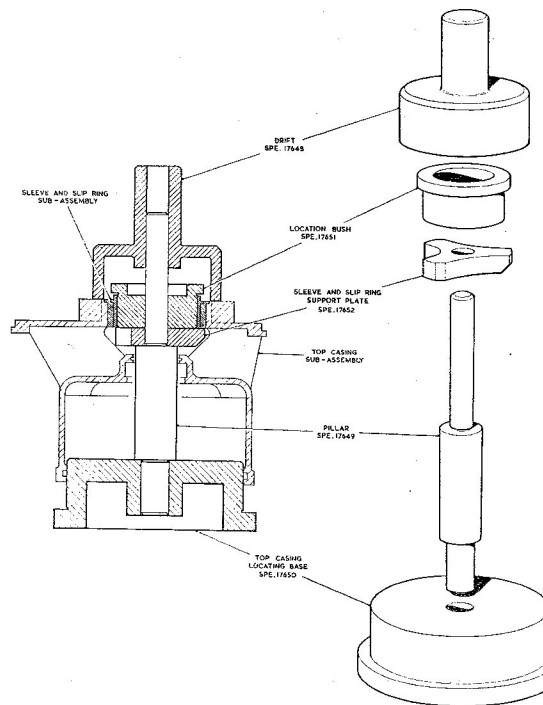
Tools for removing the slip-ring distance sleeve sub-assembly from the top casing
